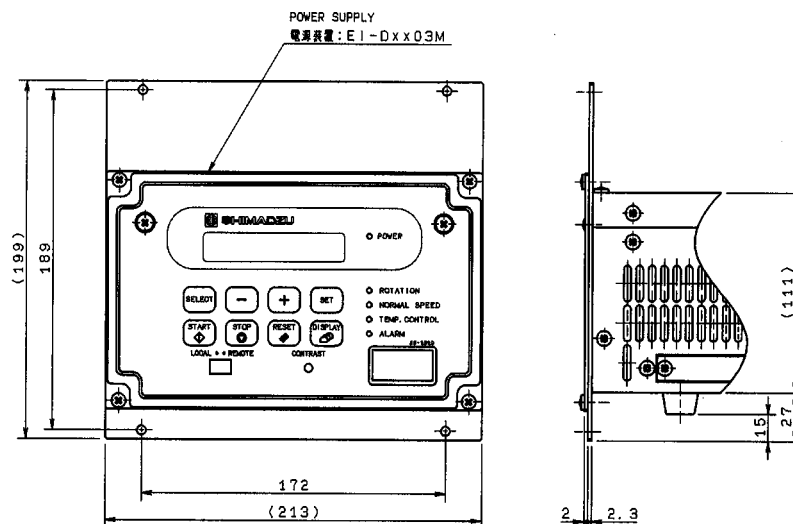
Dimensions of the Power Supply Unit with Rack Mounting Panel
